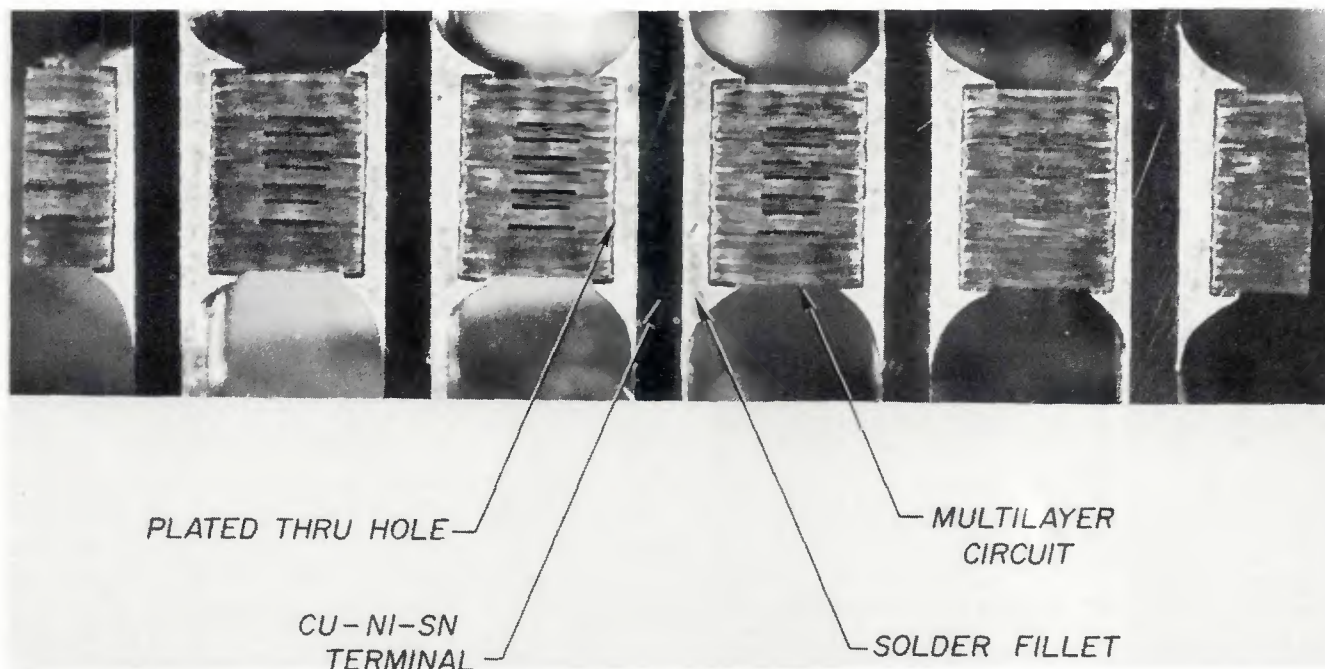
Cross sections of solder joints fabricated with glycerol
